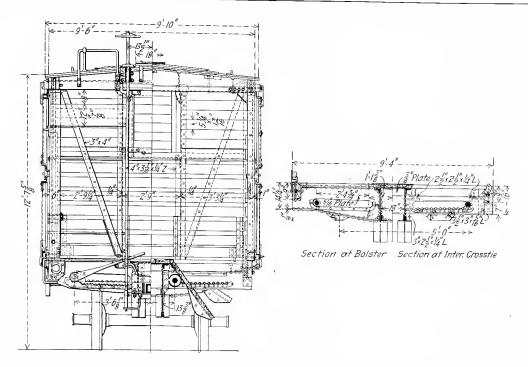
End Elevation and Cross Sections of Steel Frame 40-Ton Capacity Drop Bottom Stock and General Service Car Shown in Figs. 92 and 356.
